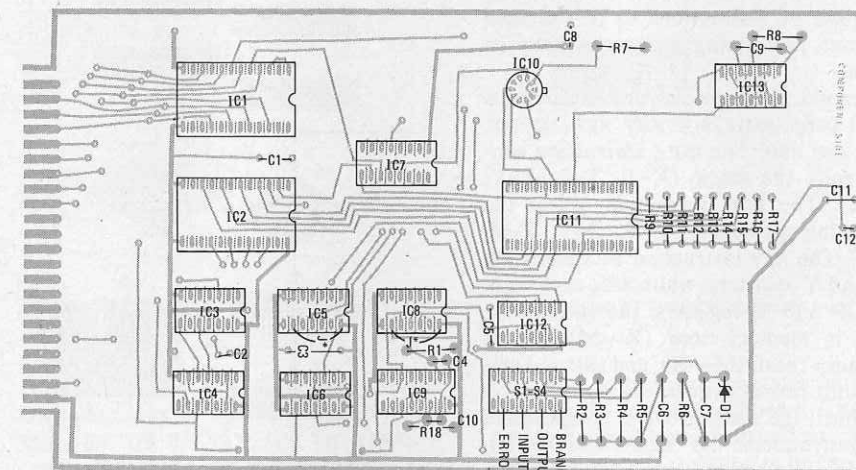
COMPONENT PLACEMENT DIAGRAM shows where the parts go on the circuit board.
